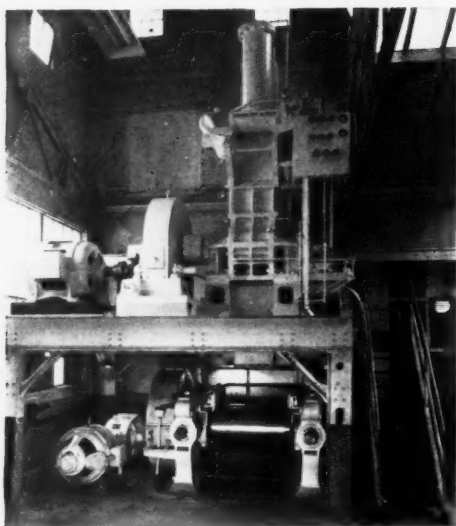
Size 3A Banbury Rubber Reclaimer and Devulcanizer Installed over Cooling and Sheetting Mill
